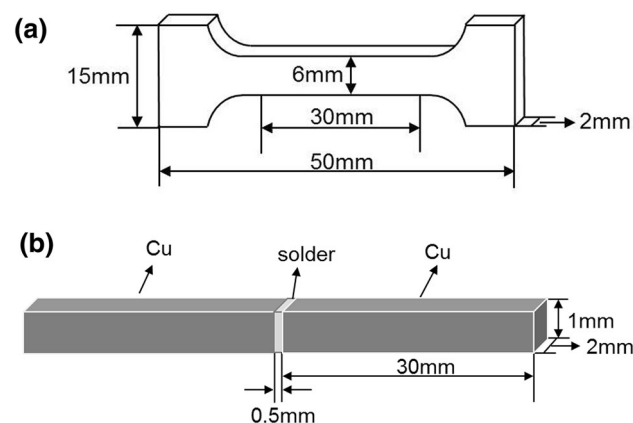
Schematic illustration of mechanical properties testing: (a) tensile test for solder alloys and (b) tensile test for solder joints.
